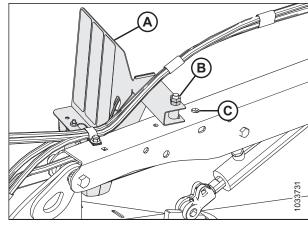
Right Light Assembly in Shipping Position – D1X Headers
